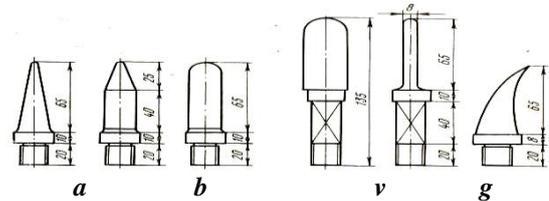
Forms of drums spinning machines. Headset of working bodies of bobbin machines.
